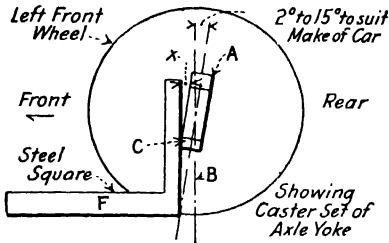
Showing "Caster Set" in Front Wheels.
